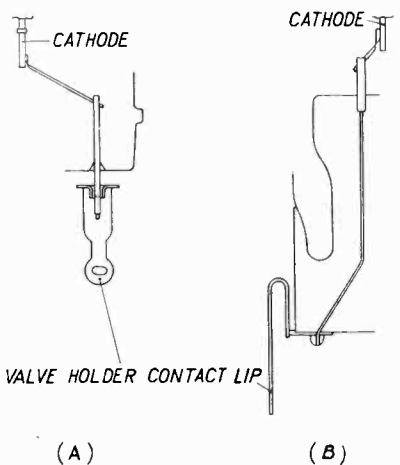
Showing the total length of the connecting wires from valve electrode to the soldering point of the valve holder. A, EF50; B, EF9.
